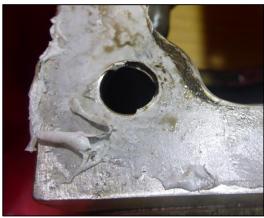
Sealant visible on crankcase parting surface following separation of crankcase halves.
